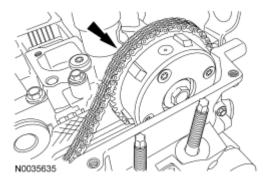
Identifying Special Camshaft Tool (303-465) Courtesy of FORD MOTOR CO.
